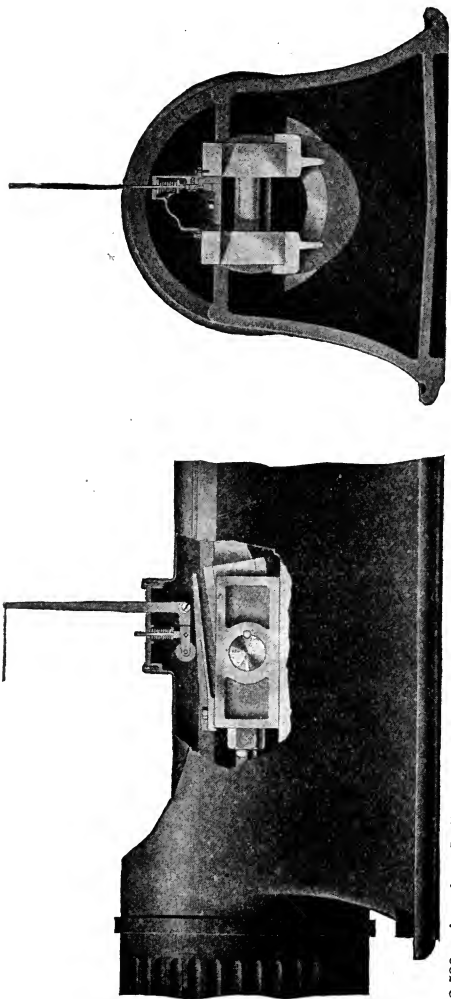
,539.—American-Ball engine reducing motion. *In construction*, the cross head is provided with an inclined plane surface adapting to imparting lateral motion to piece which contacts with the inclined plane surface. A bell crank carrying a wheel on the forked end of the short arm is pivoted so that the wheel may be held in contact with the inclined plane of cross head, and when the device is in action a spring is arranged to maintain contact. The long arm of the bell crank lever is arranged for attaching the cord leading to indicator, and the location of the pivot is such that the pull of the cord also helps to maintain the contact with the inclined plane. *In stopping* the mechanism, a trigger is arranged to engage a notch in the side of a rod attached to the bell crank, the location of the notch being such that the wheel just clears the highest point of the inclined plane when the trigger enters the notch. To engage this trigger, the bell crank is pushed slightly beyond its normal swing, so that the trigger may enter the notch and thus prevent any further motion. When ready to take another card the trigger is disengaged and the reducing motion is instantly in service. The cord remains attached to the arm, and the whole outfit, including the indicator drum, is started and stopped by the trigger.
